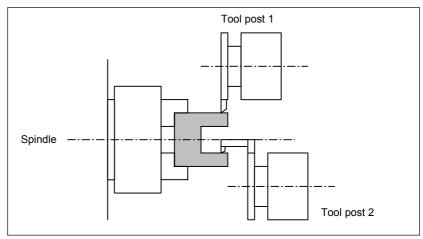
(a) Application to a lathe with one spindle and two tool posts
